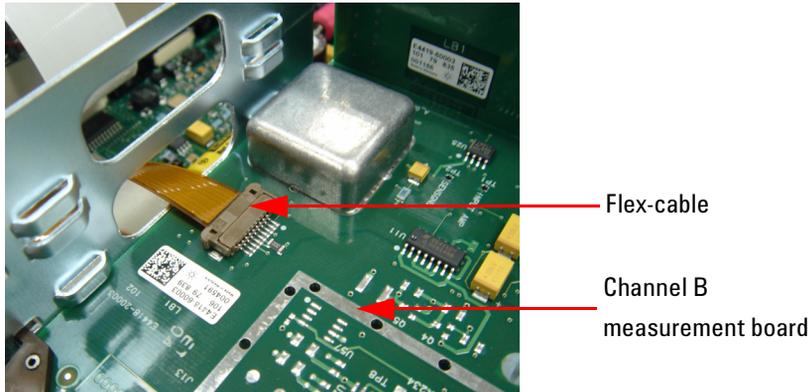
Connected Flex-cable to Channel B Measurement Board
